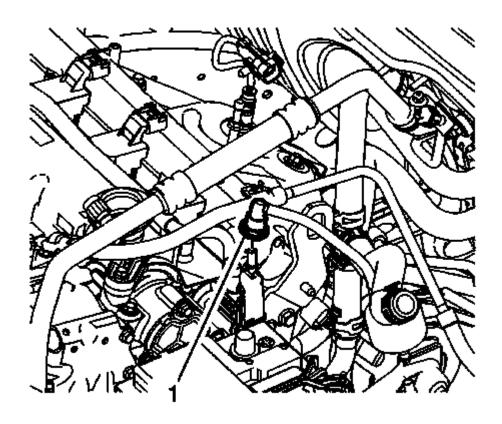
Secondary Air Injection Pipe Assembly Courtesy of GENERAL MOTORS COMPANY
